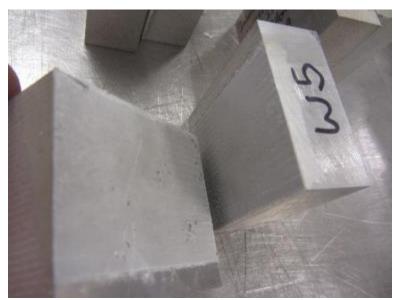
AC05 Section 8.3 Block Shear (ASTM D905) Representative A-A Specimen Failure Mode
